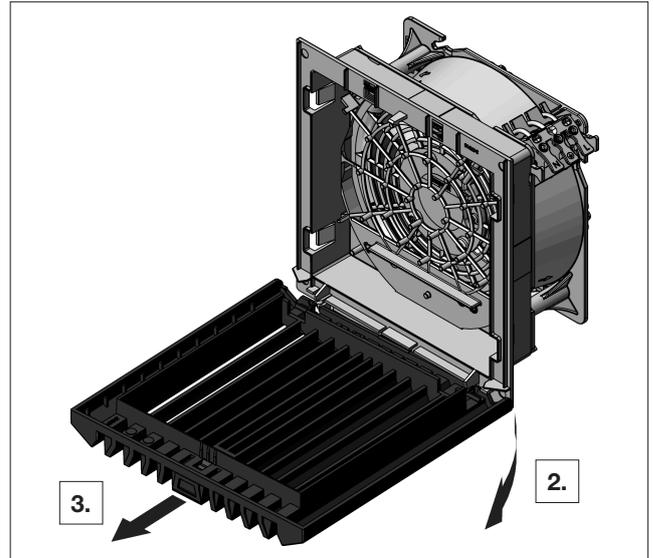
Release the r/h side of the hinge and remove the louvred grille (3237.xxx, 3238.xxx)
